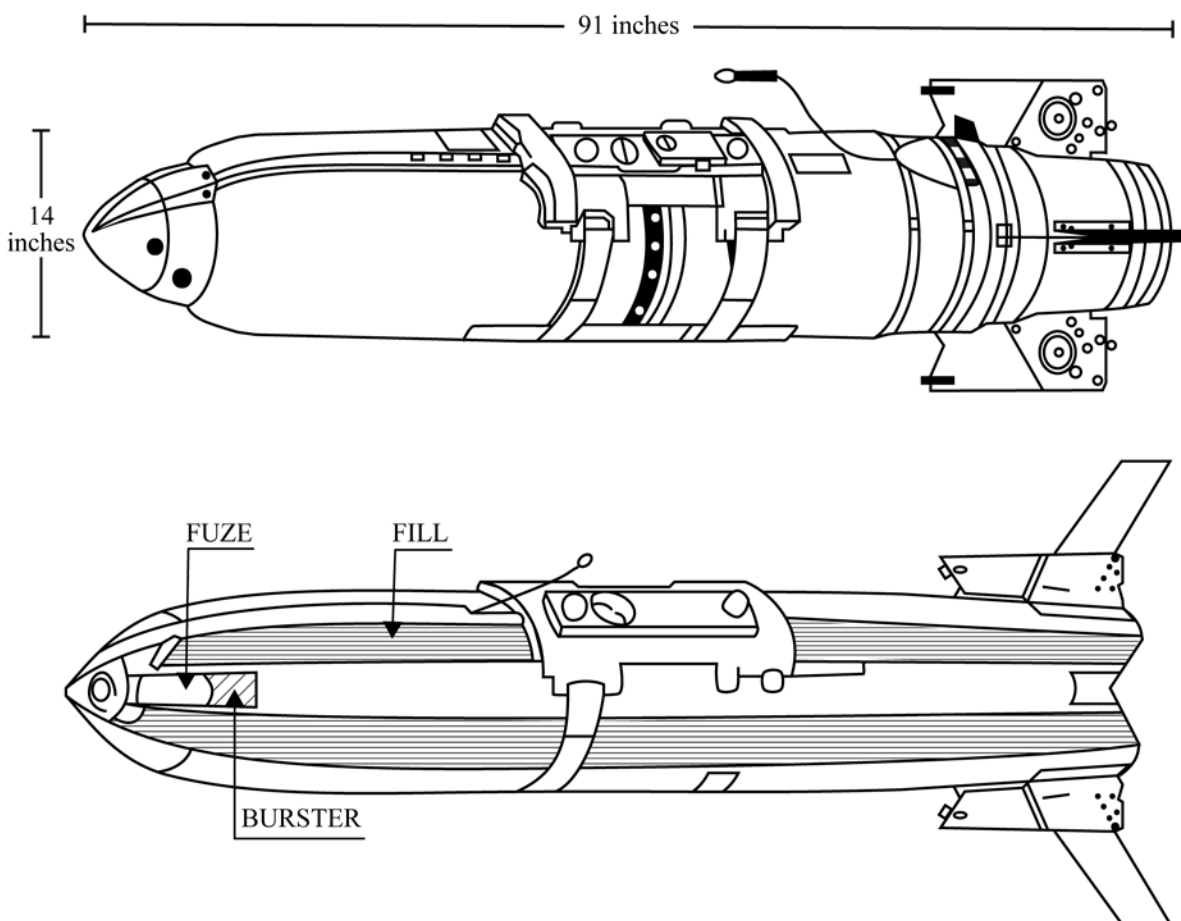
Bomb, 500-pound, MK 116 Mod 0, Weteye - Line Drawing
